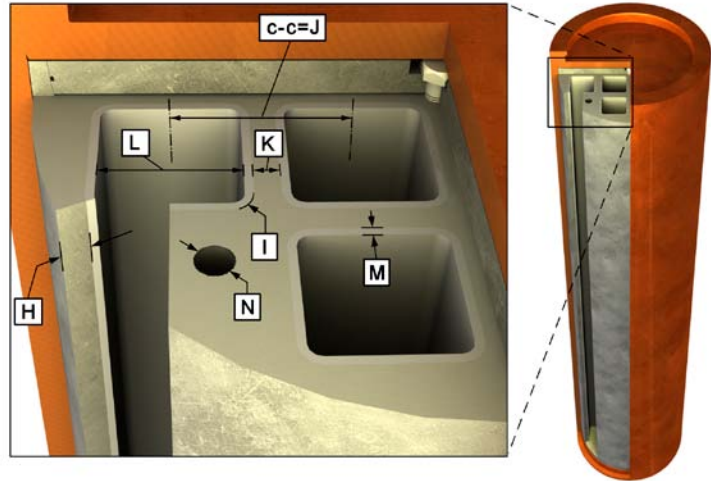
Insert channel tubes with dimensions, see Table 3-4 and 3-5.
